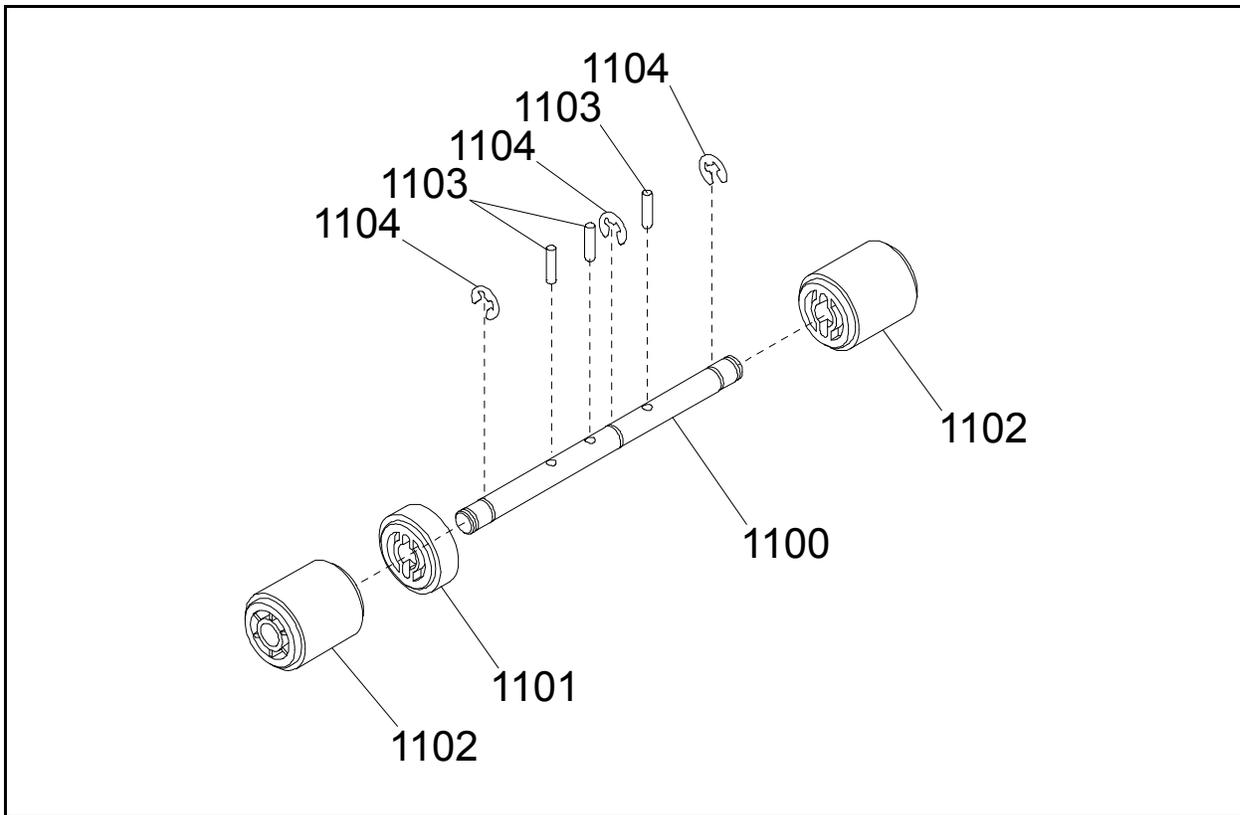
VEGA-RC Twin Rubber Pulley Assembly Exploded View
